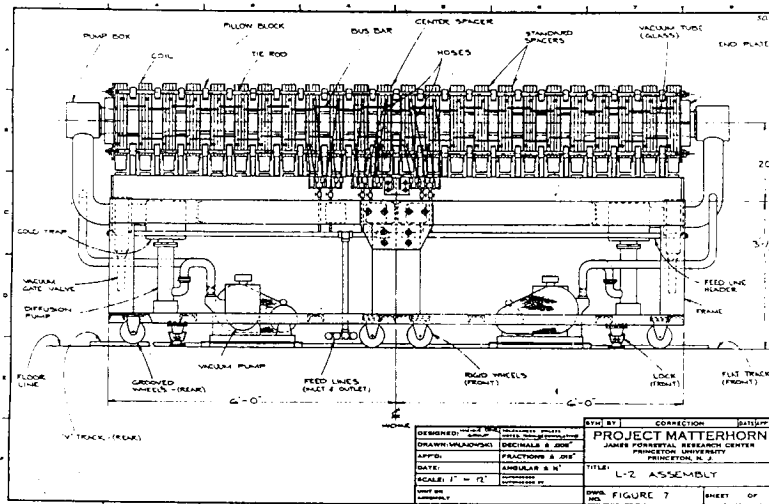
The L-2 machine with the hard core installed (Ref. 27).
